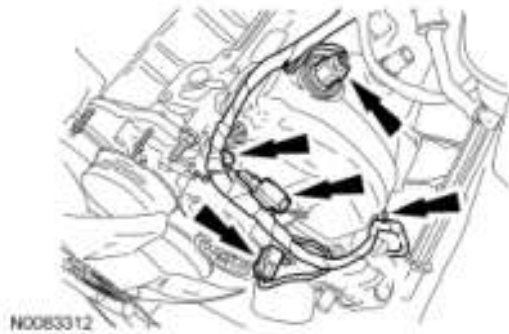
Locating Radio Interference Capacitor Electrical Connector Retainer And Wiring Harness Retainers
